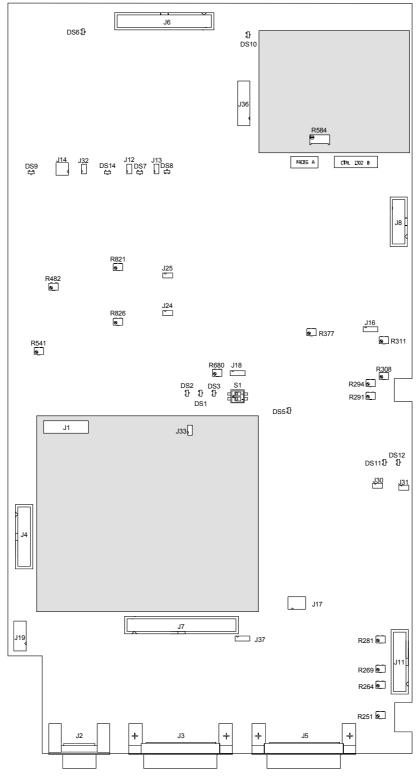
CTRL 11170 PCB PHYSICAL VIEW
